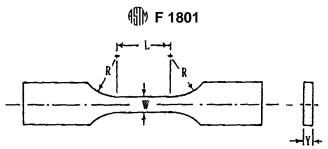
Specimens With Tangentially Blending Fillets Between the Uniform Test Section and the Ends
